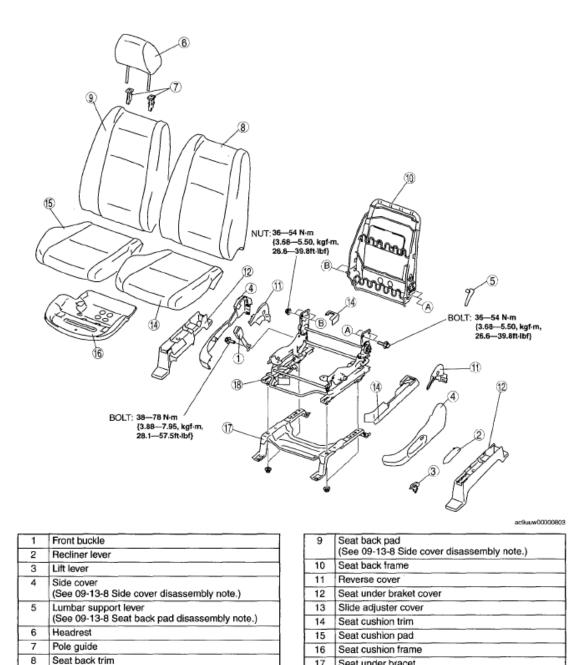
Identifying Front Seat Connector & Torque Specifications Courtesy of MAZDA MOTORS CORP.
